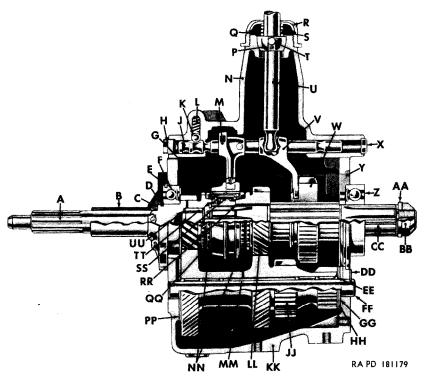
Cross sectional view of transmission with gearshift hand lever, assembly.
